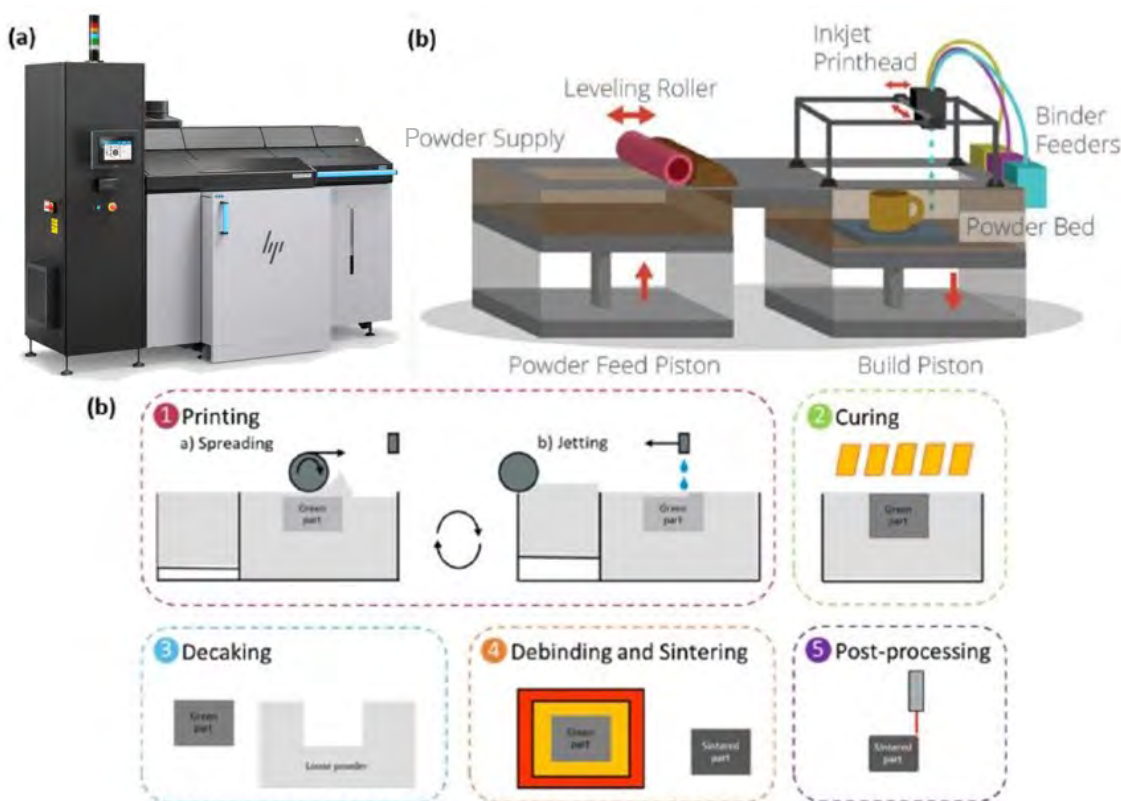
(a) HP Metal Jet Printer. Courtesy of HP, (b) Scheme of the working principle of the Metal Jet printing process, (c) Workflow of the part fabrication.
